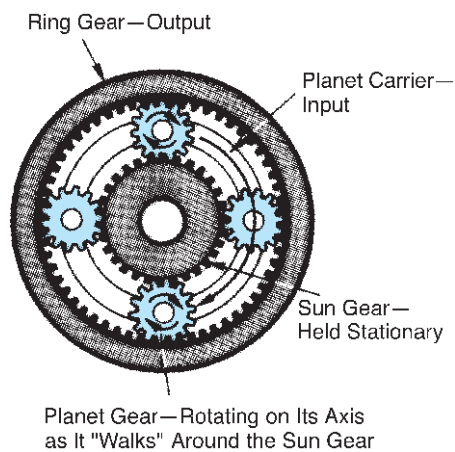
If the sun gear of a planetary gear set is held stationary while the planet carrier is rotated, the planet pinion gears will be forced to rotate on their axis and "walk" around the sun gear. This will force the ring gear to rotate at an overdrive ratio.
